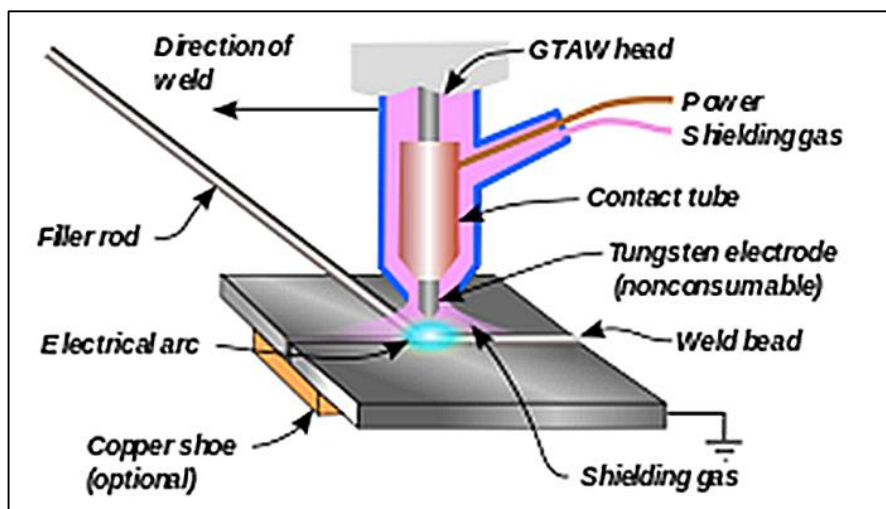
Apertures of gas tungsten arc welding.
